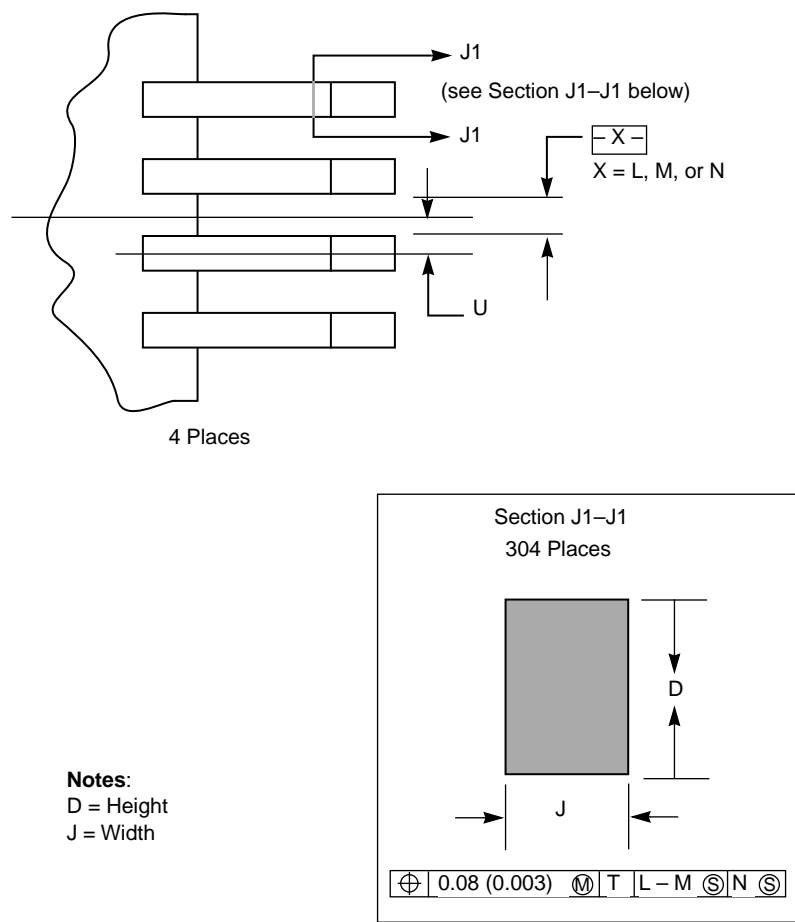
IBM C4-CQFP Mechanical Dimensions—View Y
